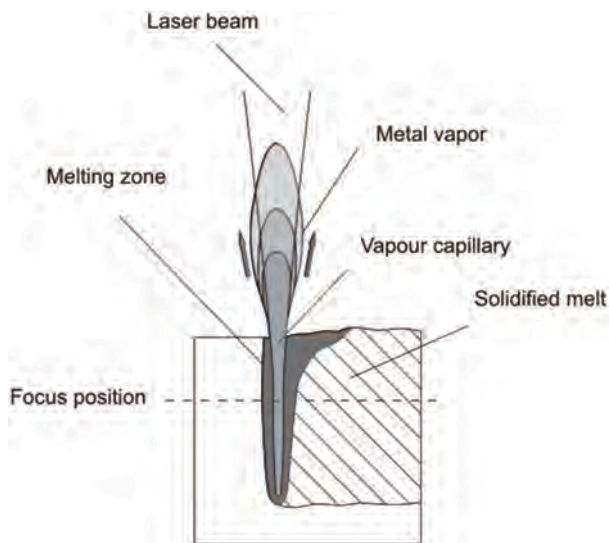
Schematic view of the keyhole during deep penetration laser welding [28]
